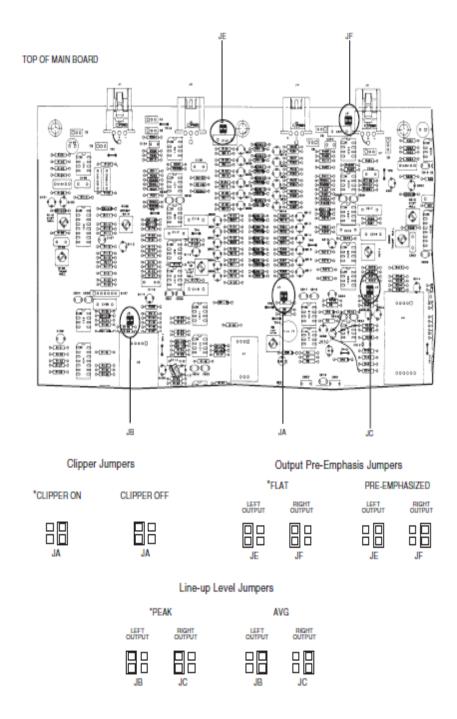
8200ST Jumper Settings (*Factory Configuration)
